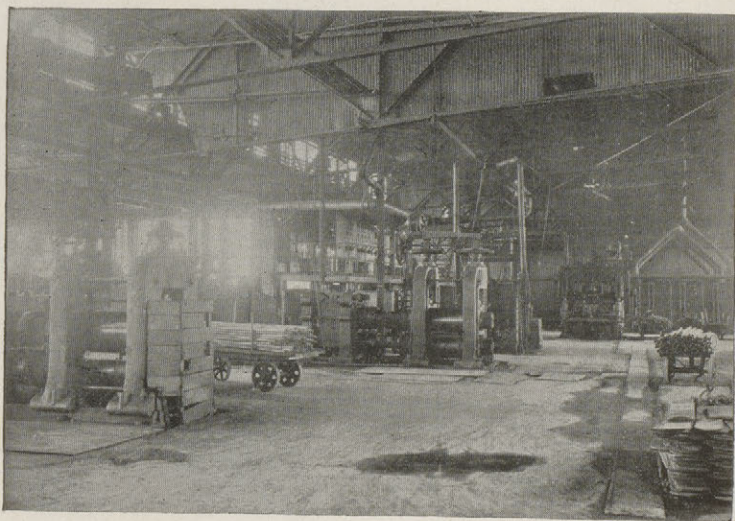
Dominion Copper Products Co., Ltd., Rolling Mill.
